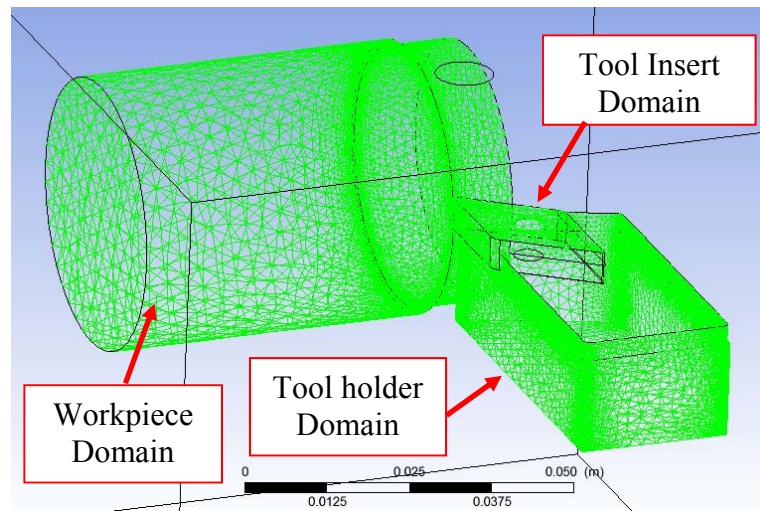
Mesh wireframe view showing tool insert, tool holder and workpiece domains
